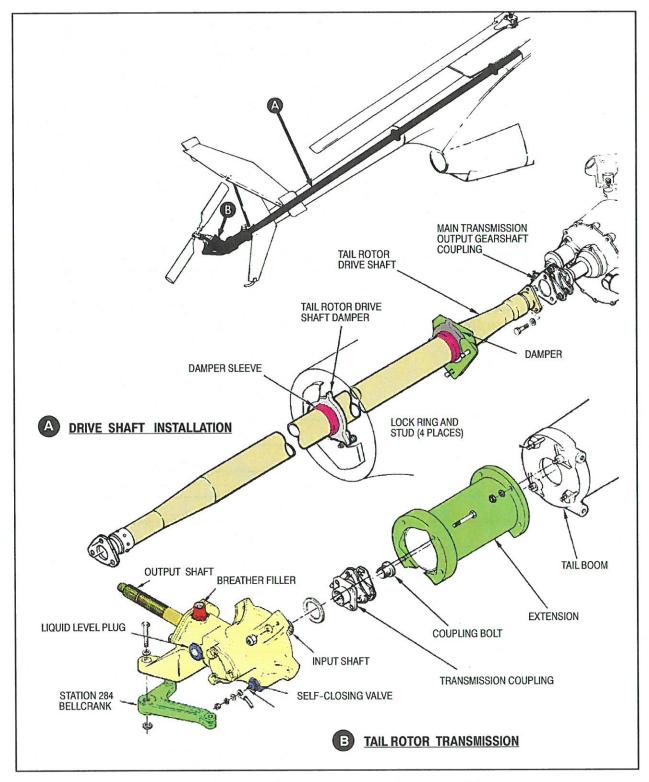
Tail Rotor Drive Shaft 530F Plus
